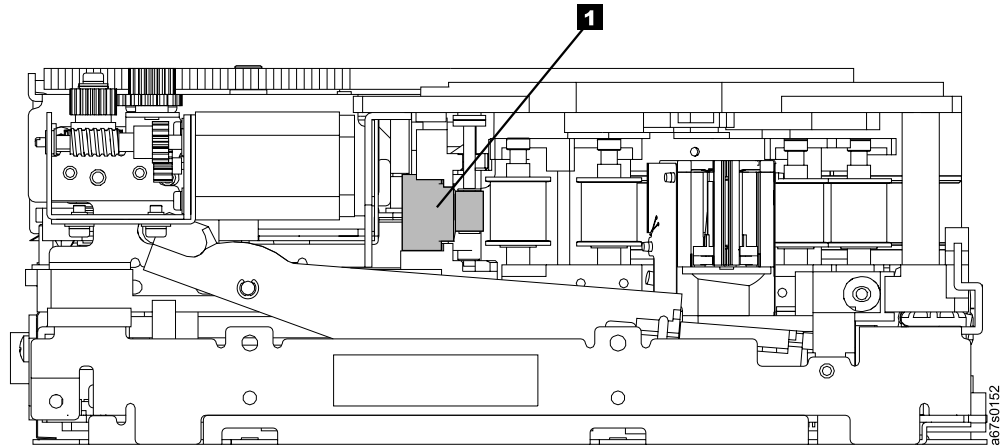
Rotating the loader motor gear so that the leader block retracts. The drive is shown on its side. The head is on the right and the arm of the head brush at the bottom of the figure.
